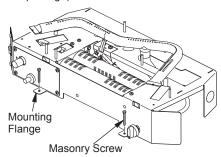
Attaching Base Assembly to Fireplace Floor (30" Model Shown)
